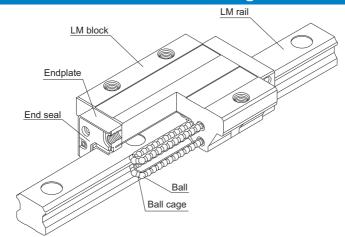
Structural Drawing of the Caged Ball LM Guide Model SHS
